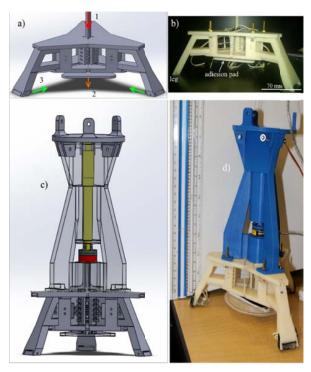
(a) The designed CAD model of the gripper: The red arrow indicates the initialized movement of the motor (1) resulting in the orange arrows pushing down the adhesive pad (2) and sliding of the legs (3) (b) the fabricated gripper (c) an assembled CAD model of the gripper and the on top mounted embedment for the motor (yellow); the motor is attached to the compressive load cell (red), so the force can be measured, which is needed to push down the adhesive pad, (d) shows the fabricated gripper with the mounted motor and implemented load cell
